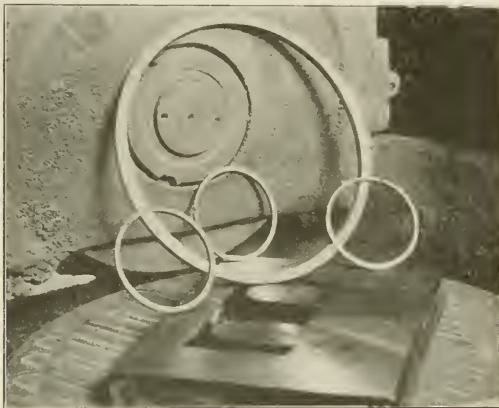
Close-Up of Packing Rings and Guide Liner Die, Ground on Heald Machine
